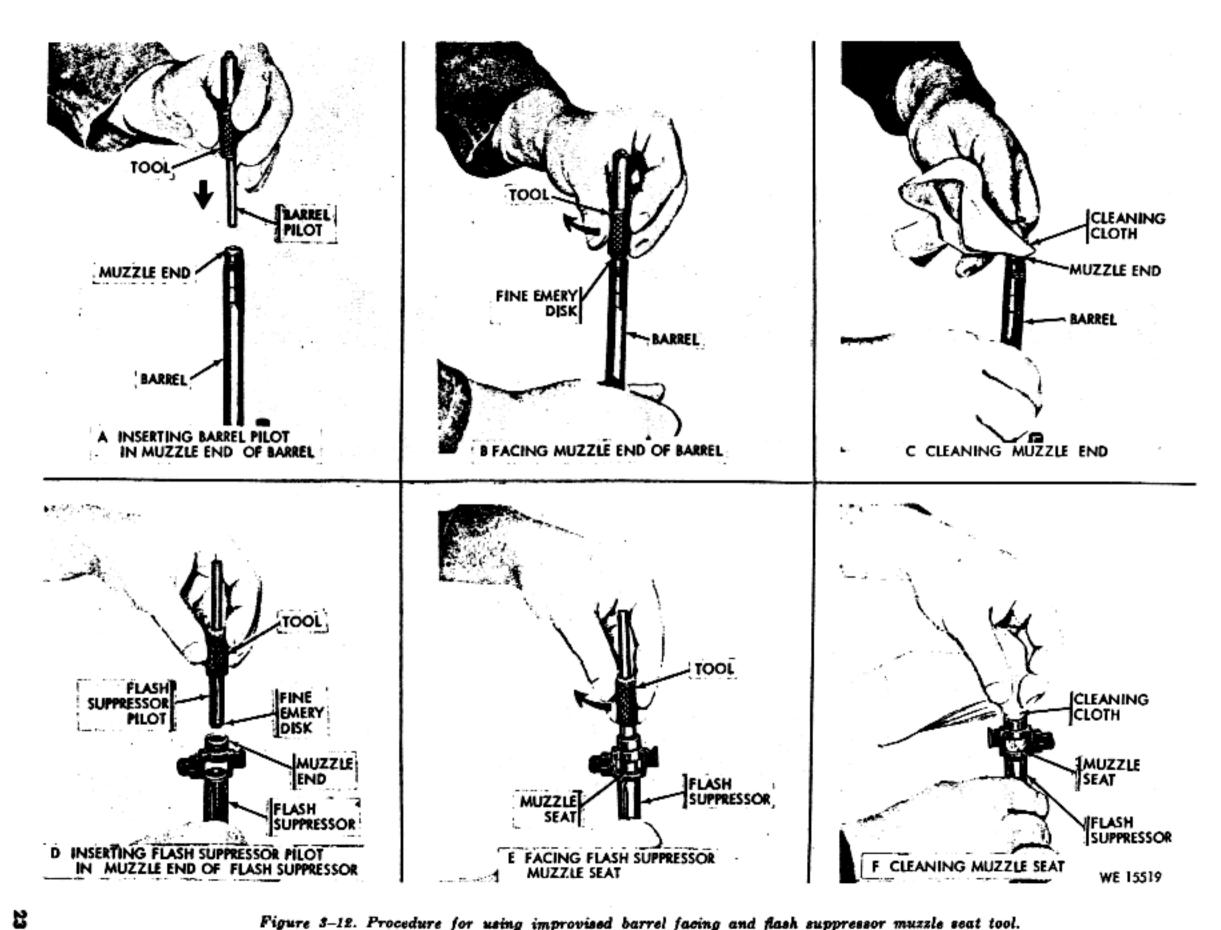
Procedure for using improvised barrel facing and flash suppressor muzzle seat tool.
